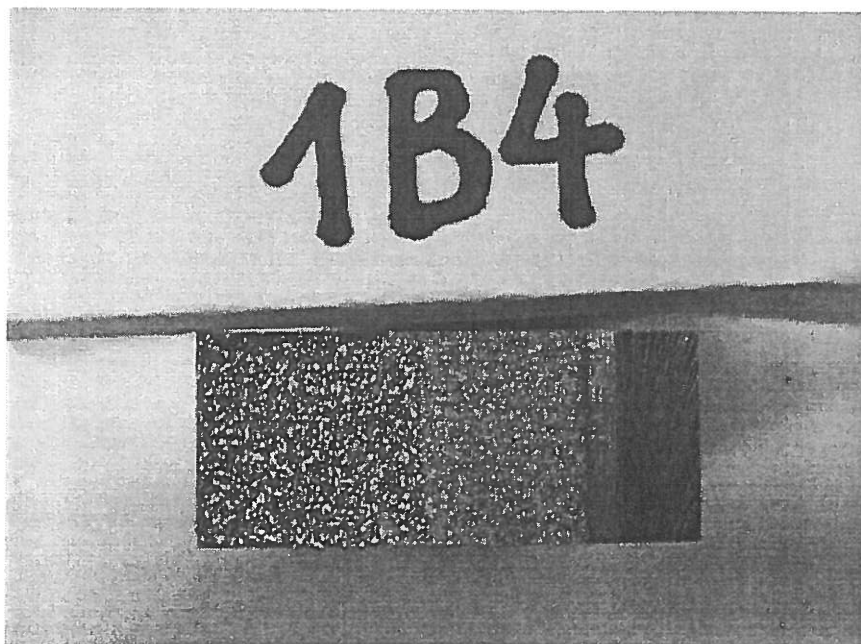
Specimen 1B4 fracture surface (small specimen)
